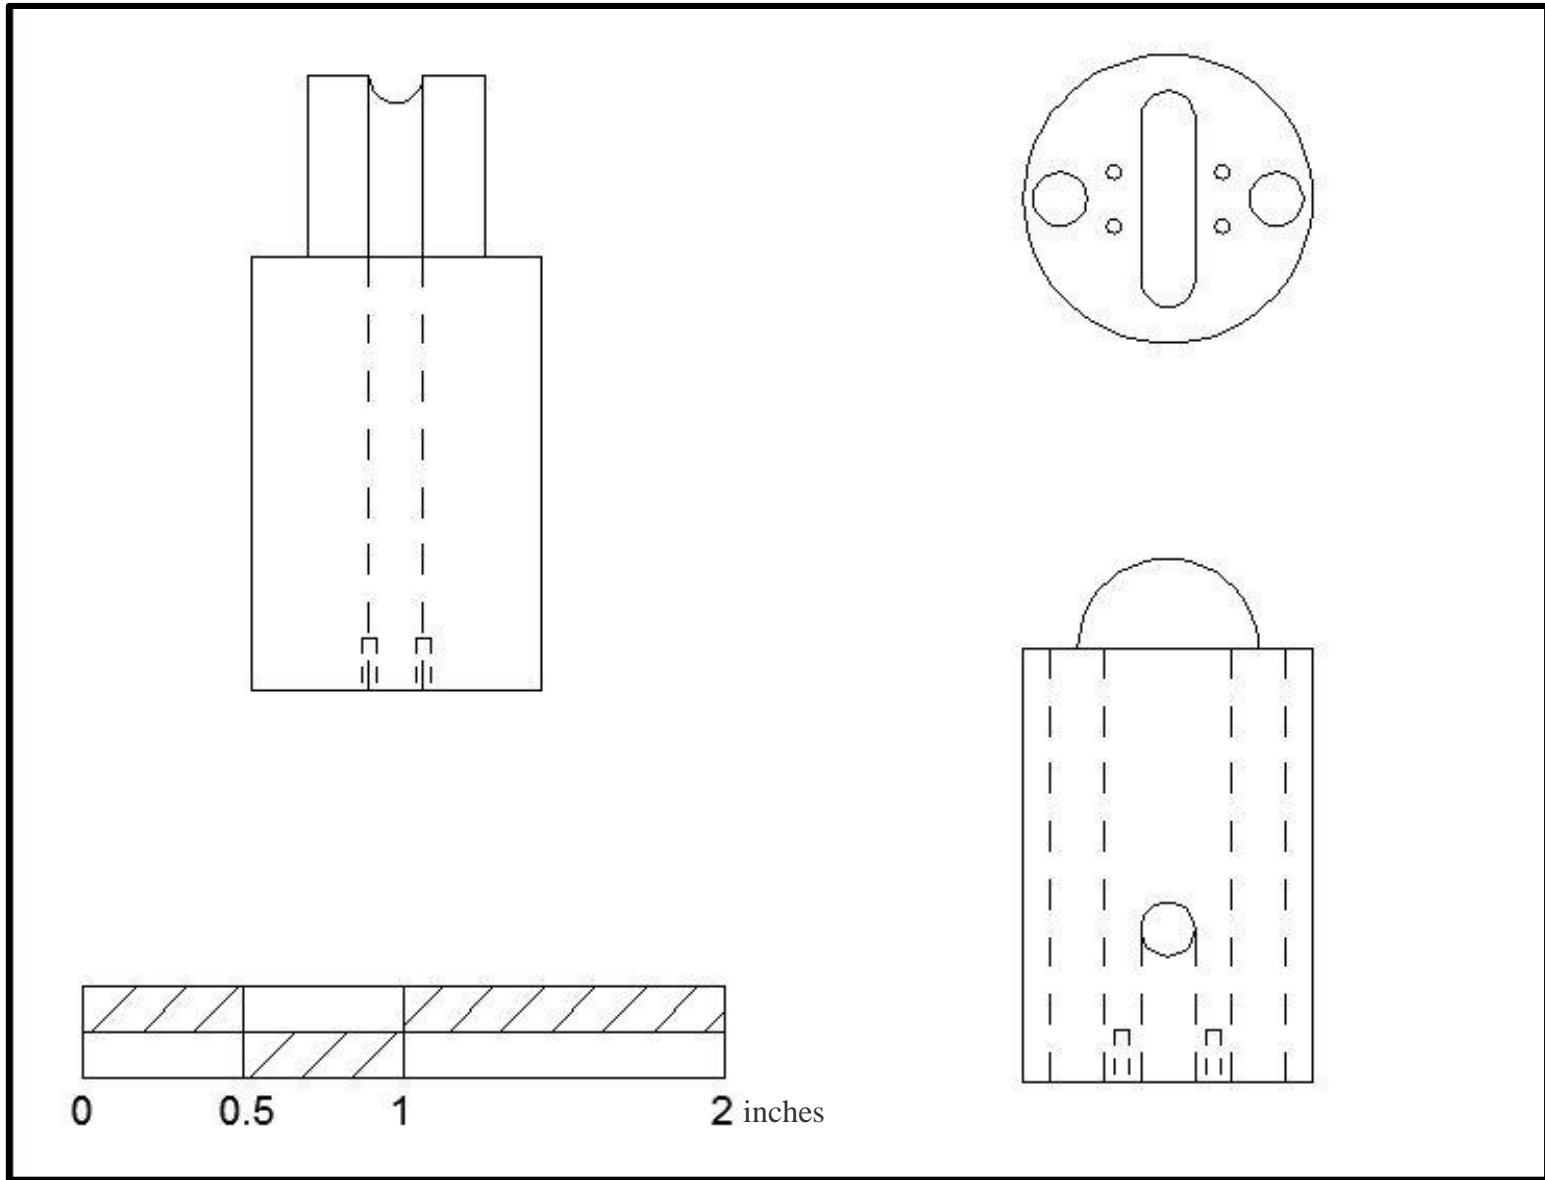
Detailed Drawing of Scratch Head - Scale in Inches
